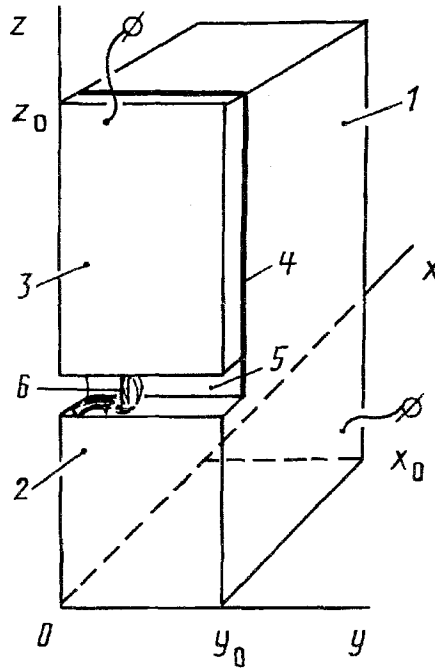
Schematic of the assembly for welding by a fixed fusing electrode: 1) base metal; 2) metal in the weld; 3) electrode; 4) insulator; 5) arc channel; 6) arc.
